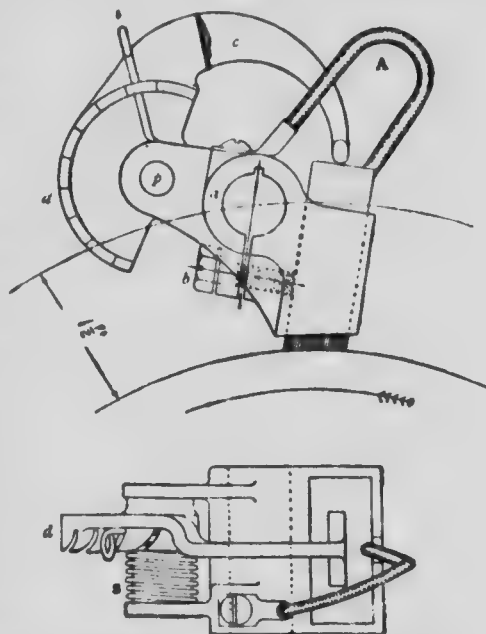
Dick, Kerr and Co.'s Carbon Brush Holder for Small Machines.
